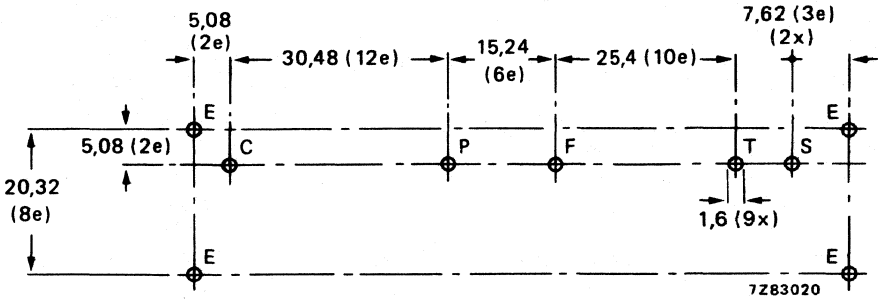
Piercing diagram viewed from solder side of board; e = 2,54 mm (0,1 in).
